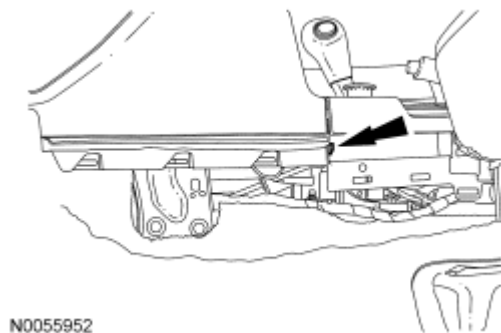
Identifying Console-To-Instrument Panel Bolts
